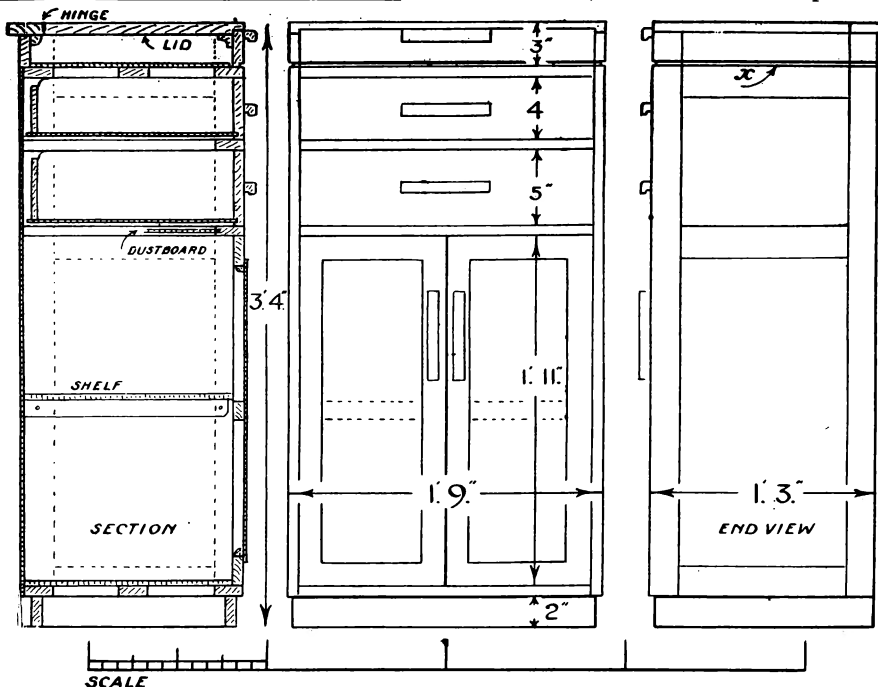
SIDE SECTION, FRONT ELEVATION, AND SIDE ELEVATION
